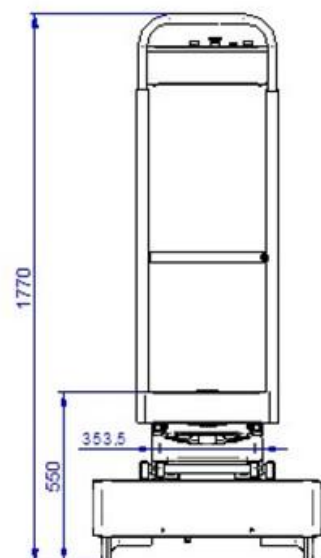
; Minimum height dimensions in mm, 2 scissors
